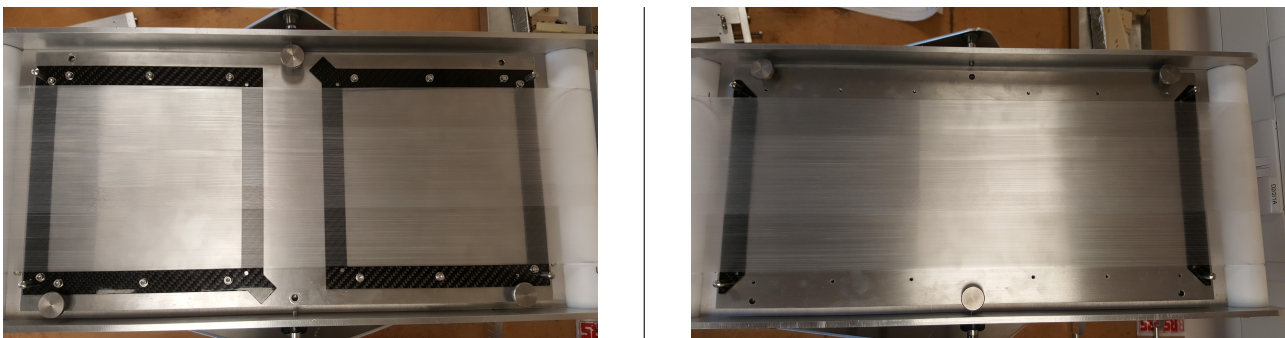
Images of the result after winding two layer of wire across the winding jig, though not enough fishing wire was available so the second layer remains incomplete. On the left is one side of the winding jig with the frames. On the right is the other side of the winding jig with the connector plates.
